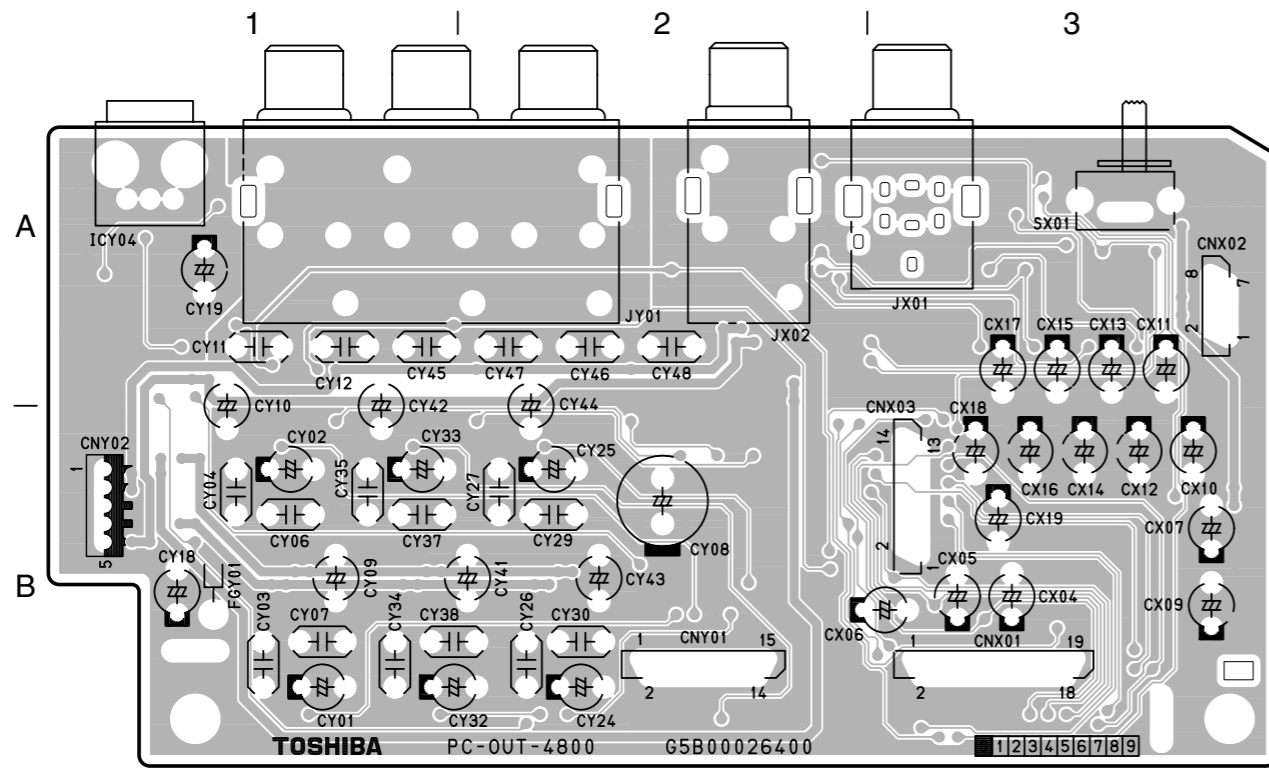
B EU05 Output PC Board (Top side)
